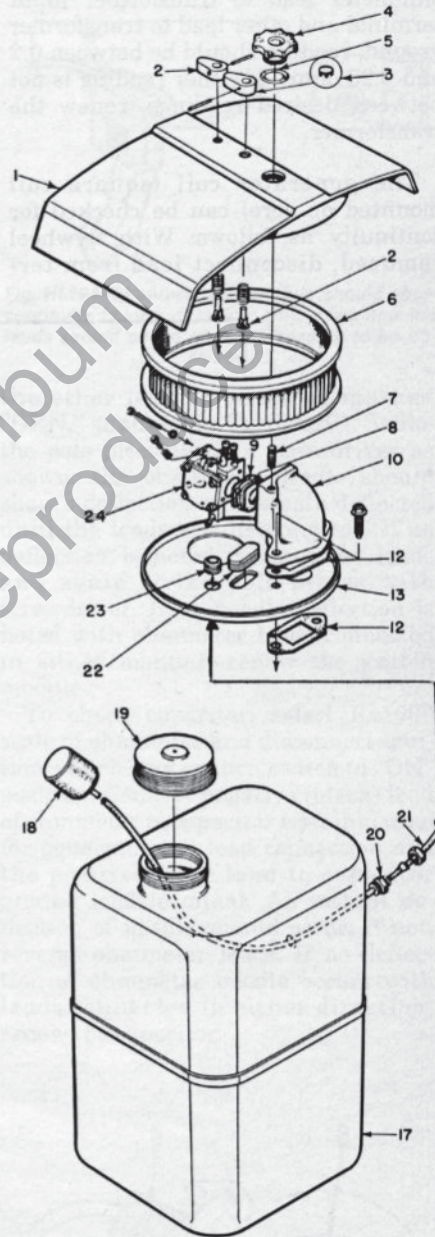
Exploded view of air intake and fuel system. Refer to Fig. HL1 for exploded view of carburetor (24). Control lever and shaft (2) is not used for throttle on generator engine and hole is covered by plug (3).
